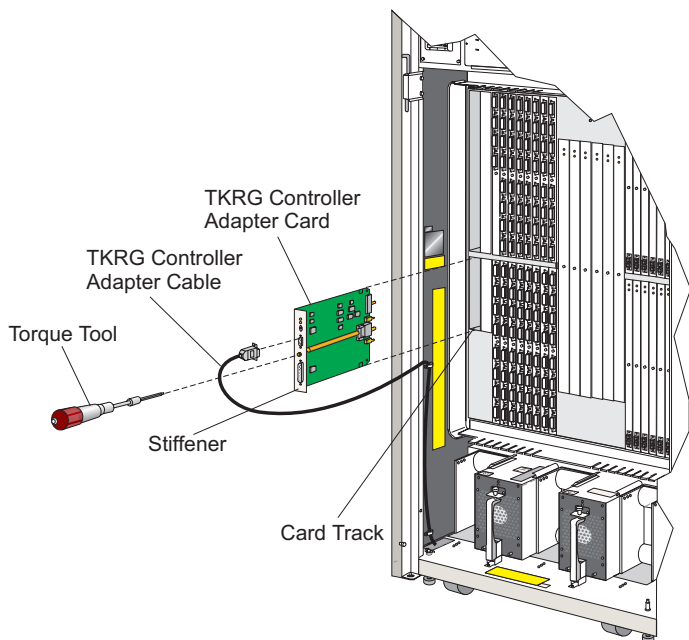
Token-Ring (TKRG) Controller Adapter Card, Redundant
